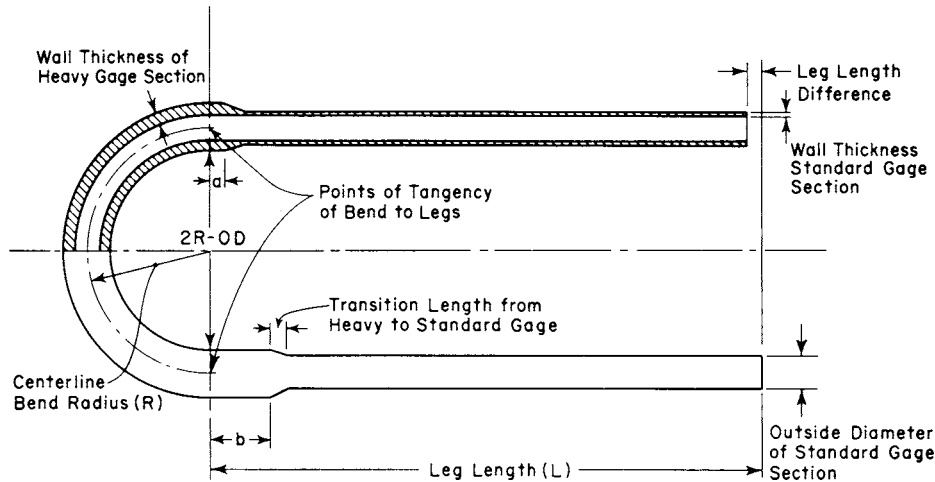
Centering of U-Bend in Heavy Gage Section of Tube
